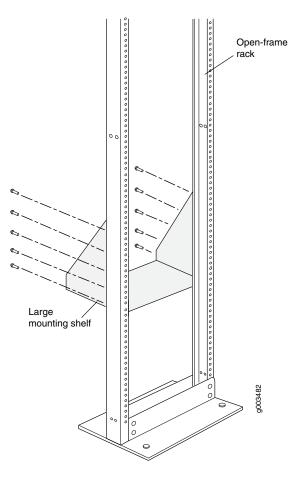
Installing the Mounting Hardware for an Open-Frame Rack
